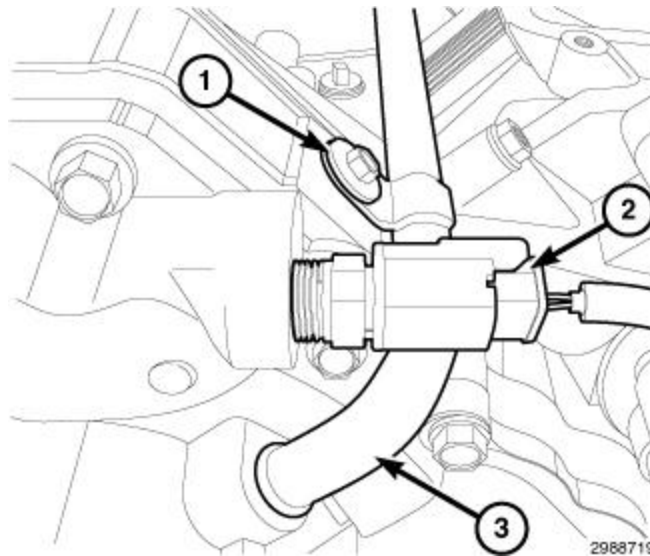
Coolant Temperature (ECT) Sensor Electrical Connector, Heater Tube & Retaining Bolt
